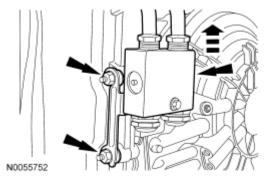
Transmission Fluid Cooler Tube Bolts Courtesy of FORD MOTOR CO.
